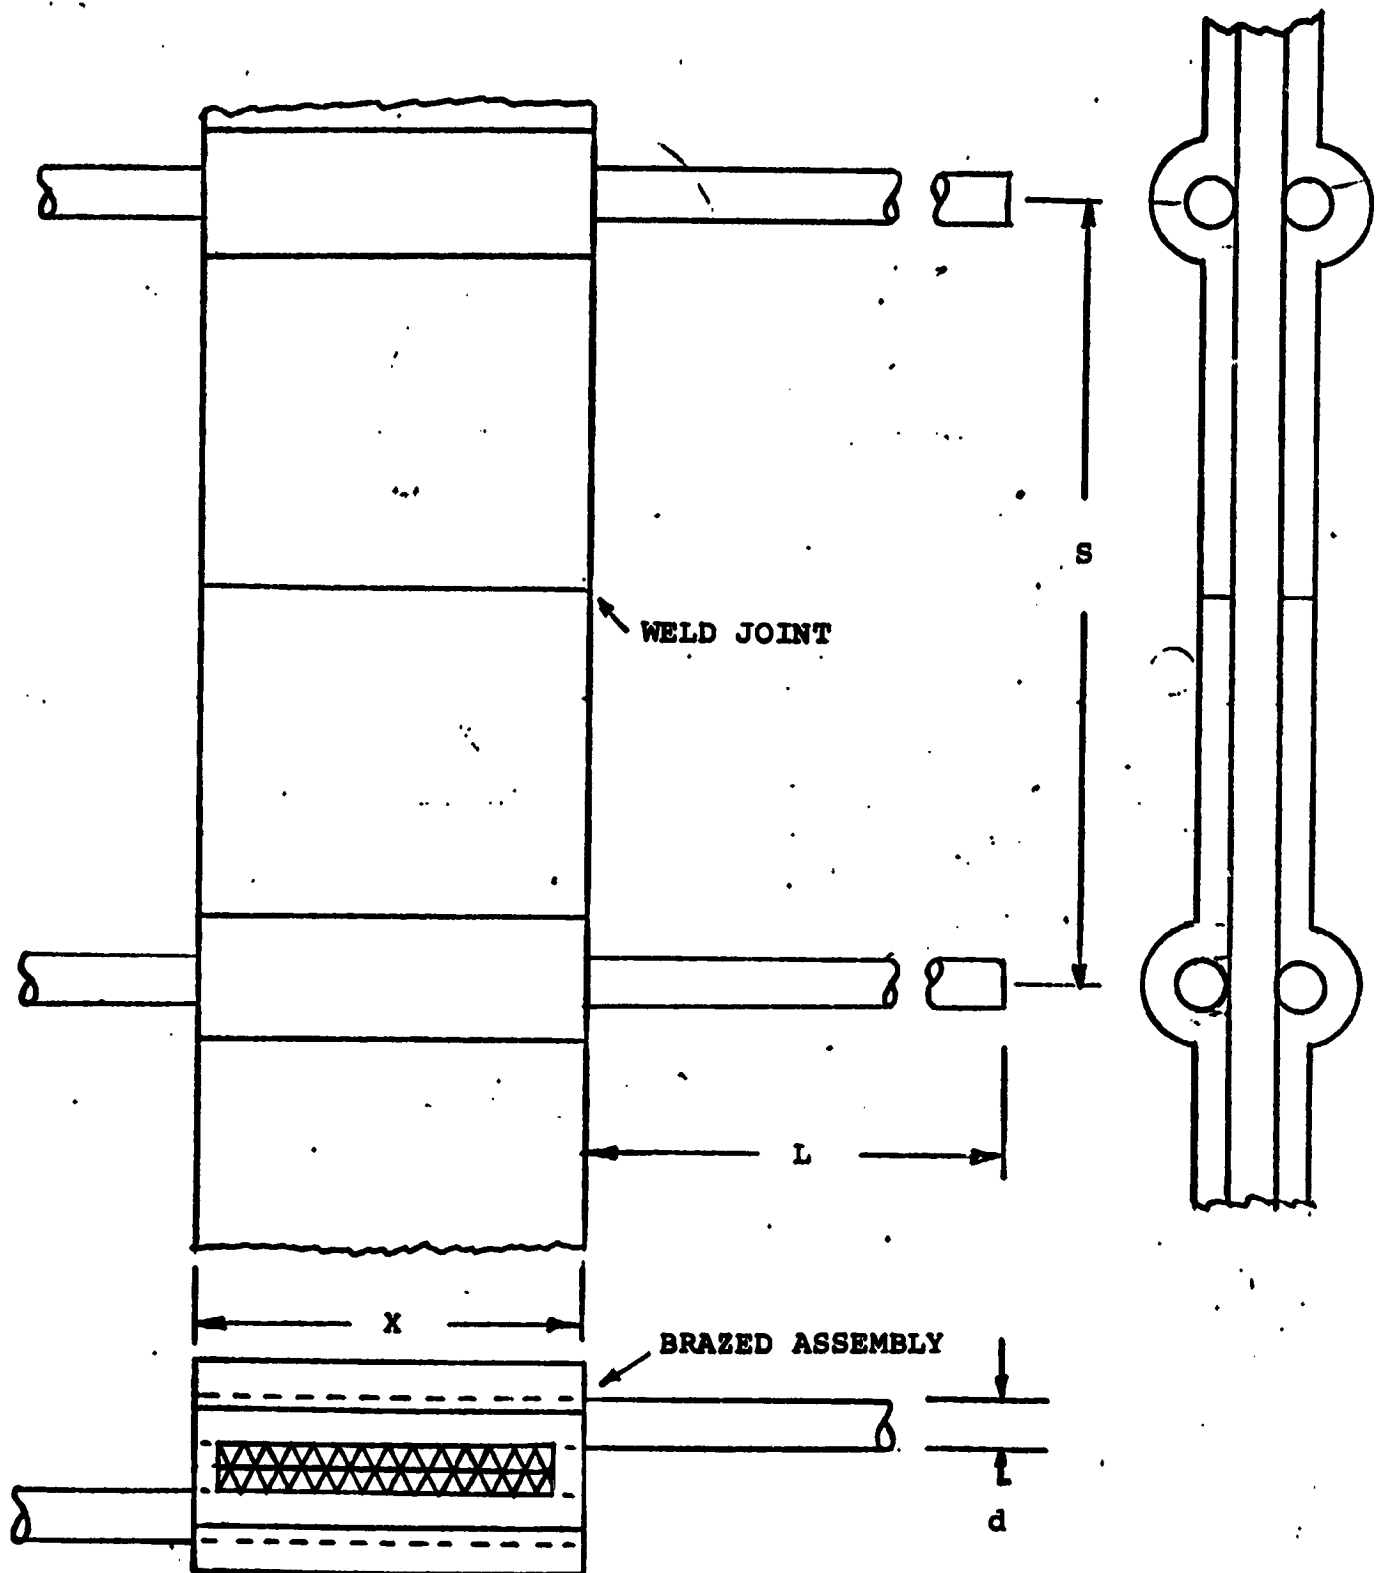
TYPICAL HEAT PIPE RADIATOR MANIFOLD DETAIL
